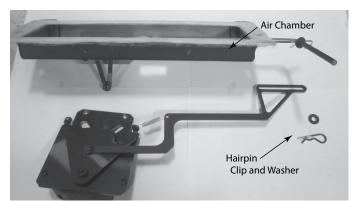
Removal of Hairpin Clip, Washer and Air Chamber
